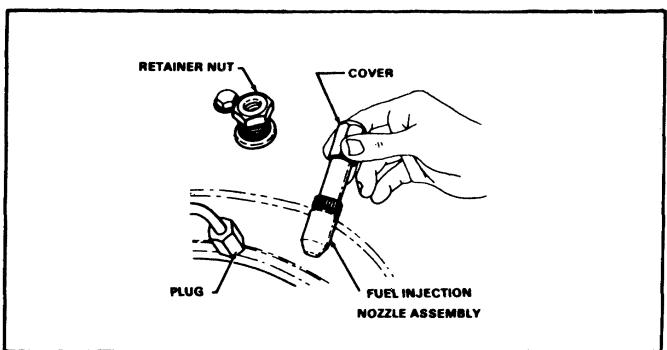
FUEL INJECTION VALVE REMOVAL
